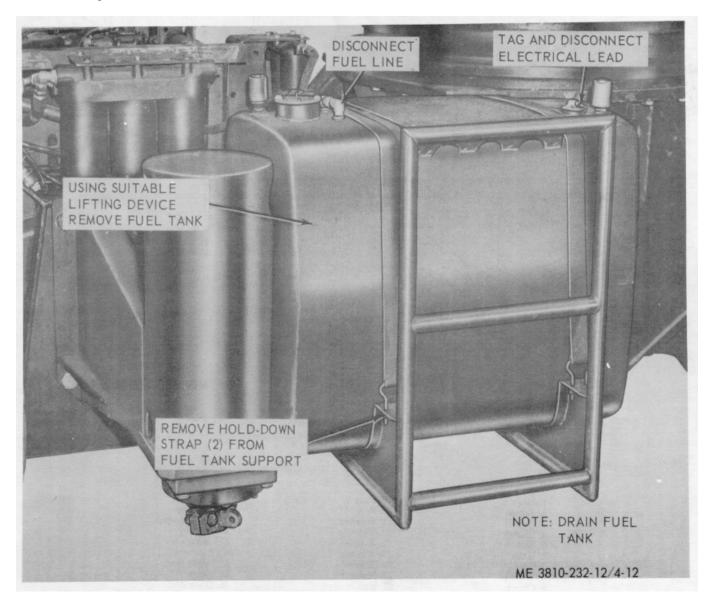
Carrier fuel tank, removal and installation (Model 2385)
